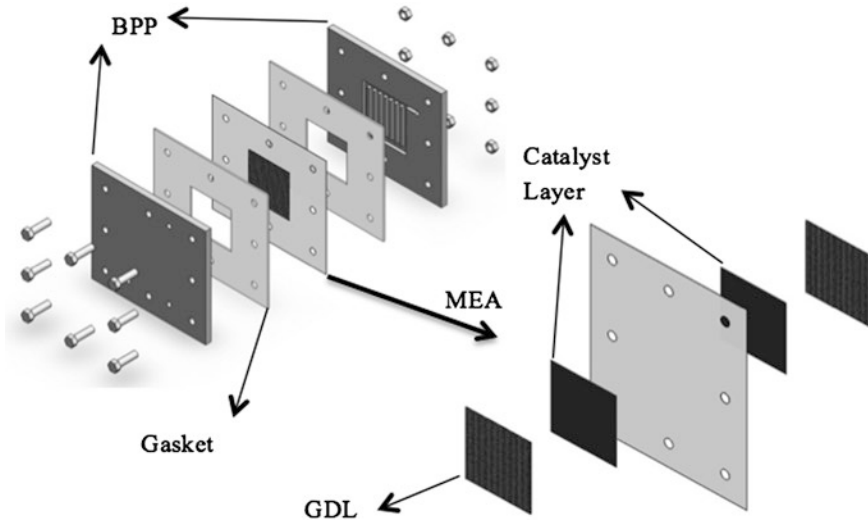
Schematic exploded view of a single fuel cell comprising membrane electrode assembly (MEA), gaskets, and bipolar plates
